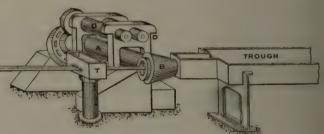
GUTTA-PERCHA COVERING MACHINE.
